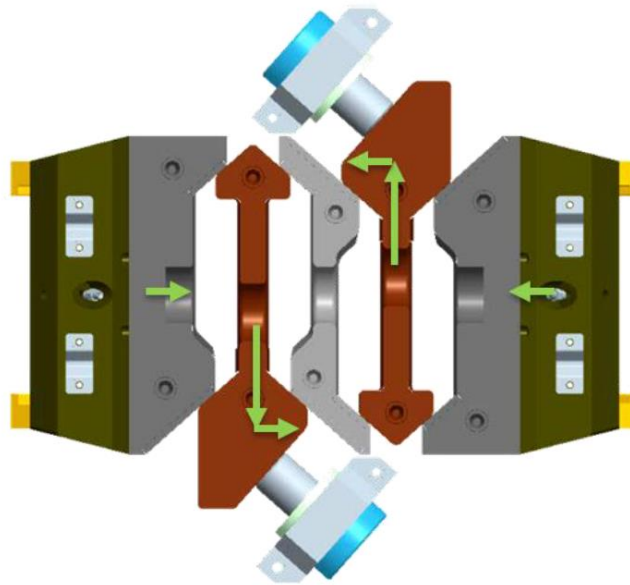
CAD model of a multi-directional forging tool for the forging of a crankshaft. The arrows indicate the multiple directions of moving tool parts (IPH-Hannover, 2015)
